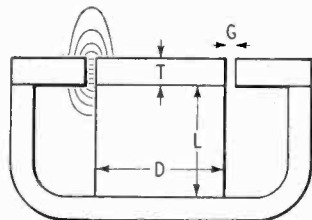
Dimensions and stray fields in the capped cylindrical-slug magnet design.
